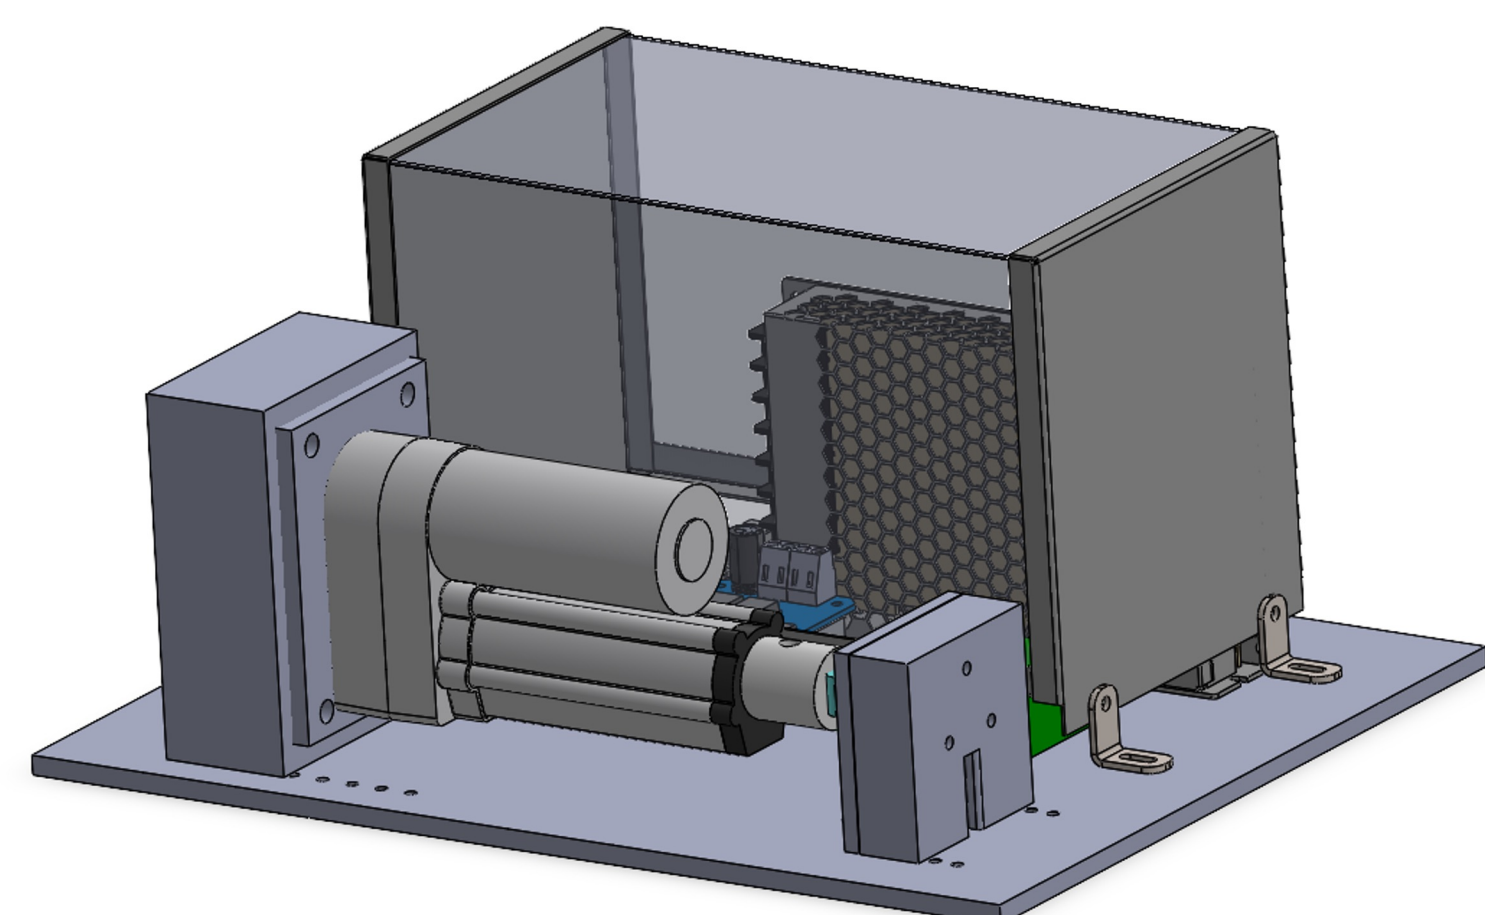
CAD model of compressive testing fixture w/ protective circuit enclosure.
